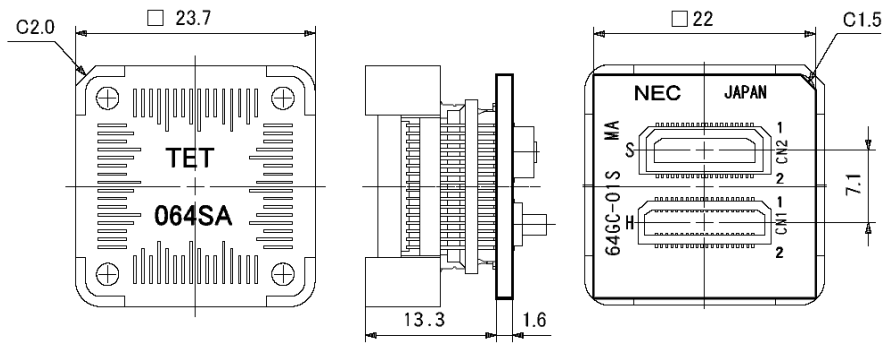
Mount Adapter for V850EA/IK1 (64-Pin GC Package)
